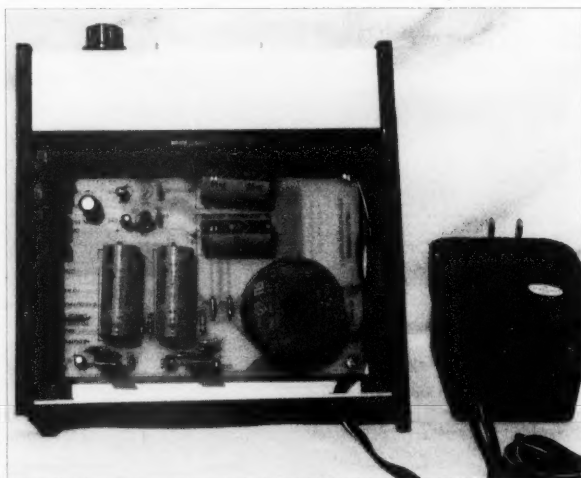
Photo A. The prototyping bench DC power supply, showing how the components are assembled inside the case.
